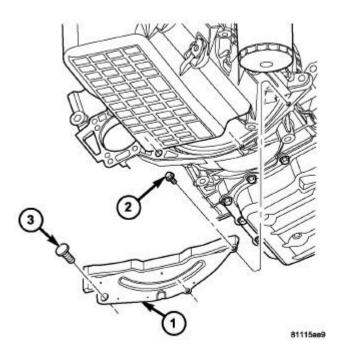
Torque Converter Dust Shield Courtesy of CHRYSLER LLC
